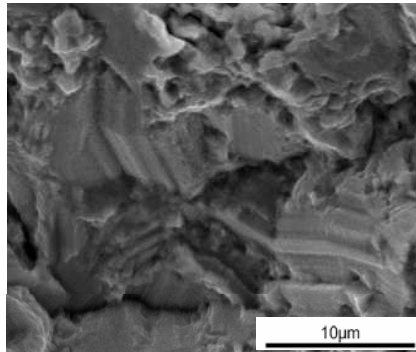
Fatigue fracture surface (stage 2a) for case of sub-surface initiated
